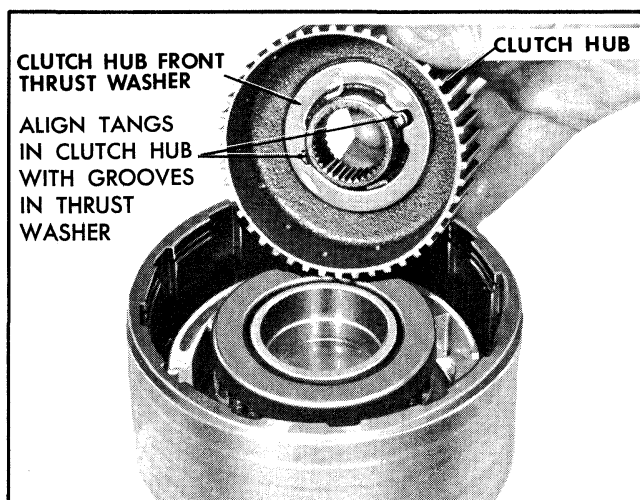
B-82 Installing Clutch Hub Front Thrust Washer
